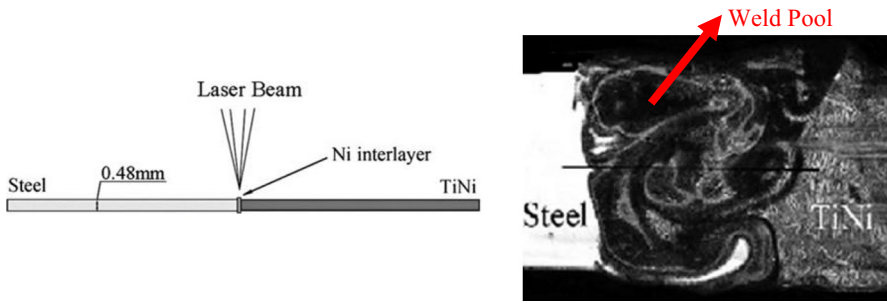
(a) NiTi and stainless-steel welding with Ni interlayer (b) Macrostructure of Weld pool generated [48]
